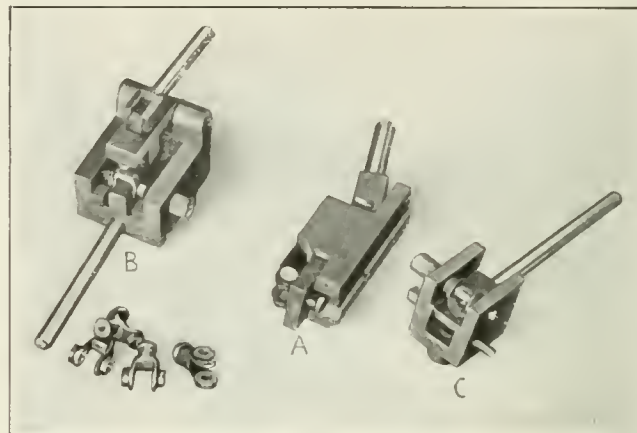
Use of the Rocker Arm Clevis Milling and Drilling Jigs
